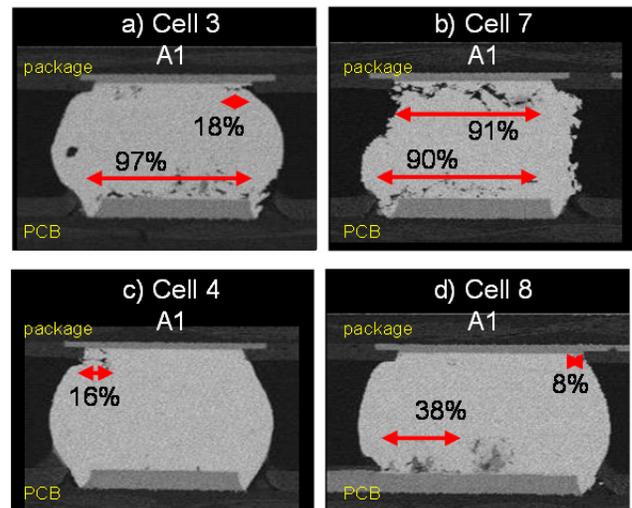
Cross-section of typical 292MAPBGA corner solder-joints after 3000 cycles. a) small die SAC387, b) large die SAC387, c) small die SnAg, d) large die SnAg. All with 11mil thick die. Note the propensity for cracking on the PCB side and the distorted solder-joint shapes.
